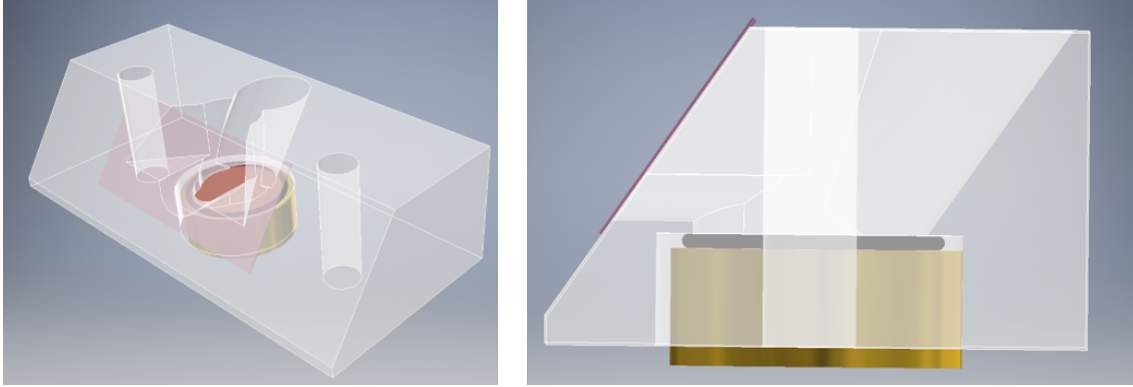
(left) Assembly of S/L TERS sample cell (see figure 3.3 for technical drawing), placed on a single crystal, with a sealing O-ring in between. A glass window (pink) is glued on the sample cell. (right) Side view of assembly of S/L TERS sample cell and single crystal sample. The O-ring seals the water/electrolyte reservoir.
